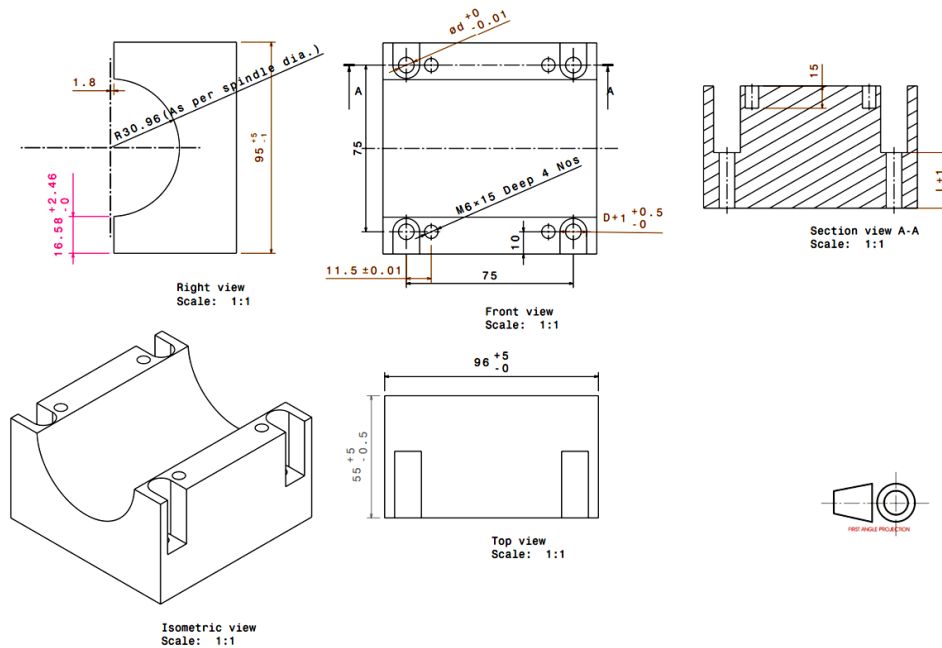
CAD model and drawings of spindle holding mount (SHM)
